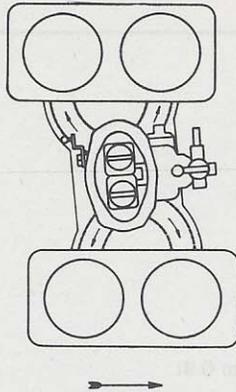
Single carburettor fitted to a four-cylinder V-engine (Sec 1)
